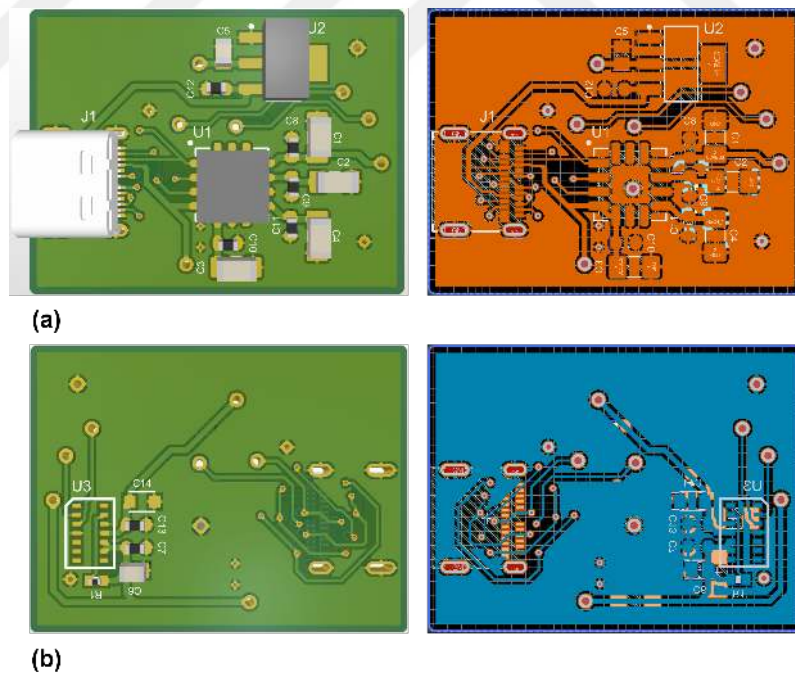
The PCB design of the daughter body and the front (a) and back (b) view of the PCB.
